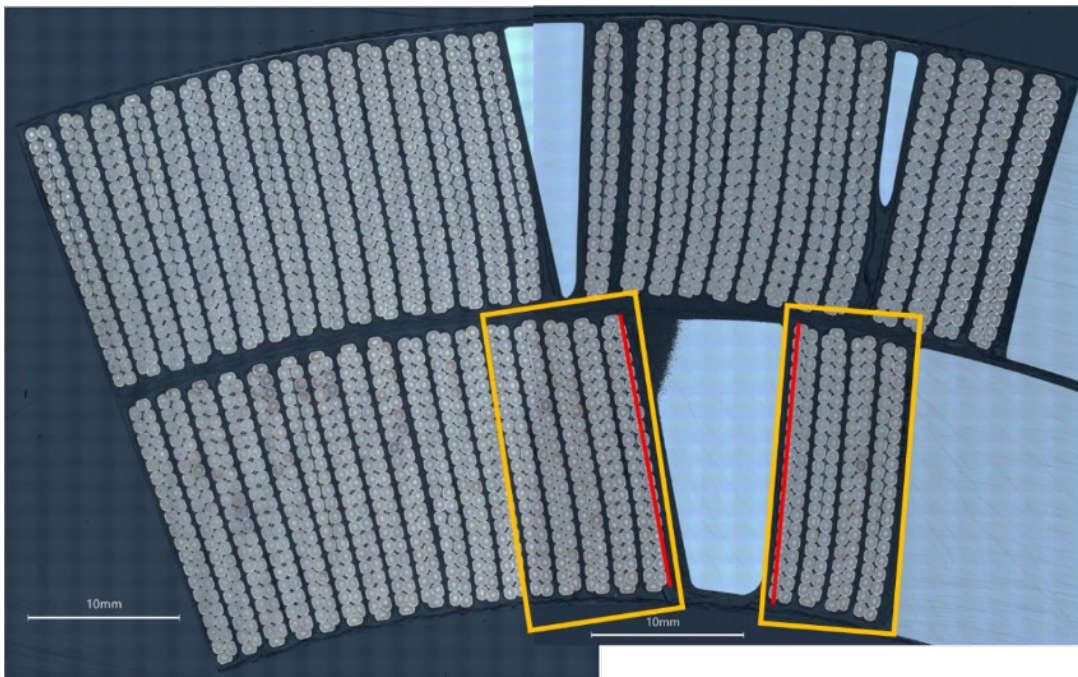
Plan for longitudinal cuts along wedge to end-spacer transitions
